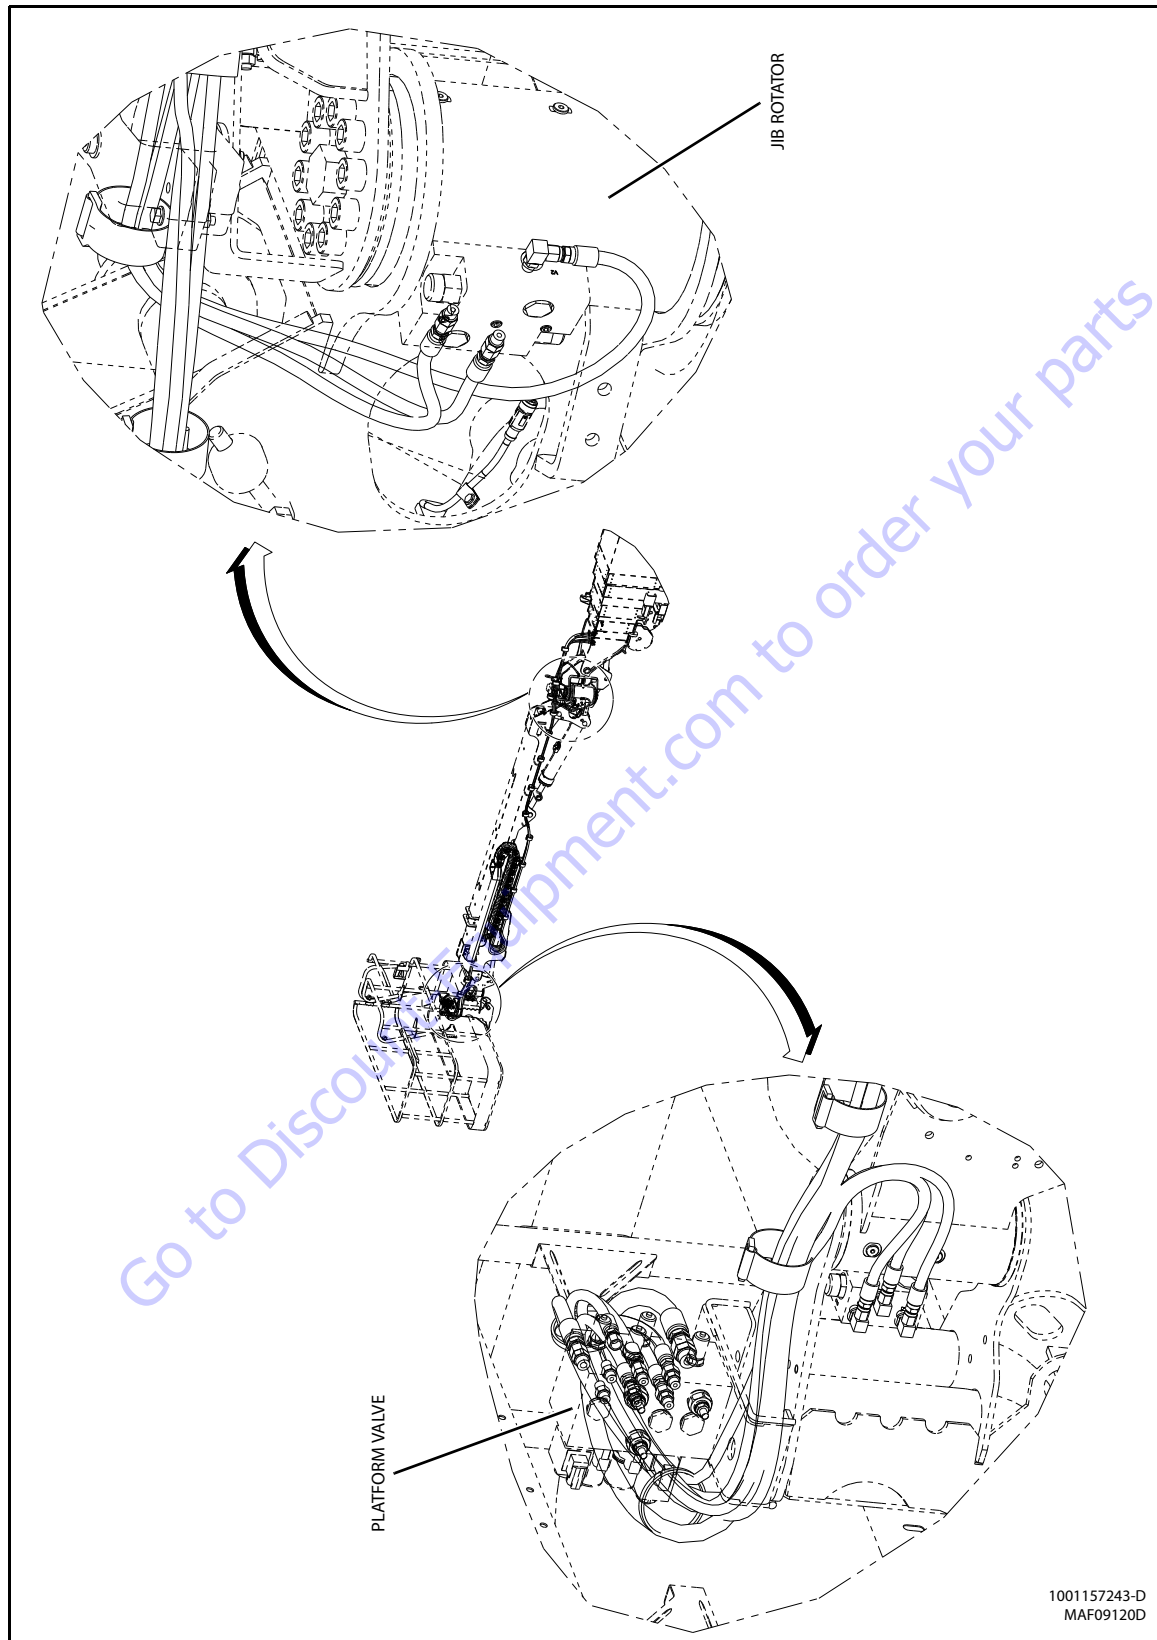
Jib Hydraulics - Sheet 5 of 7
